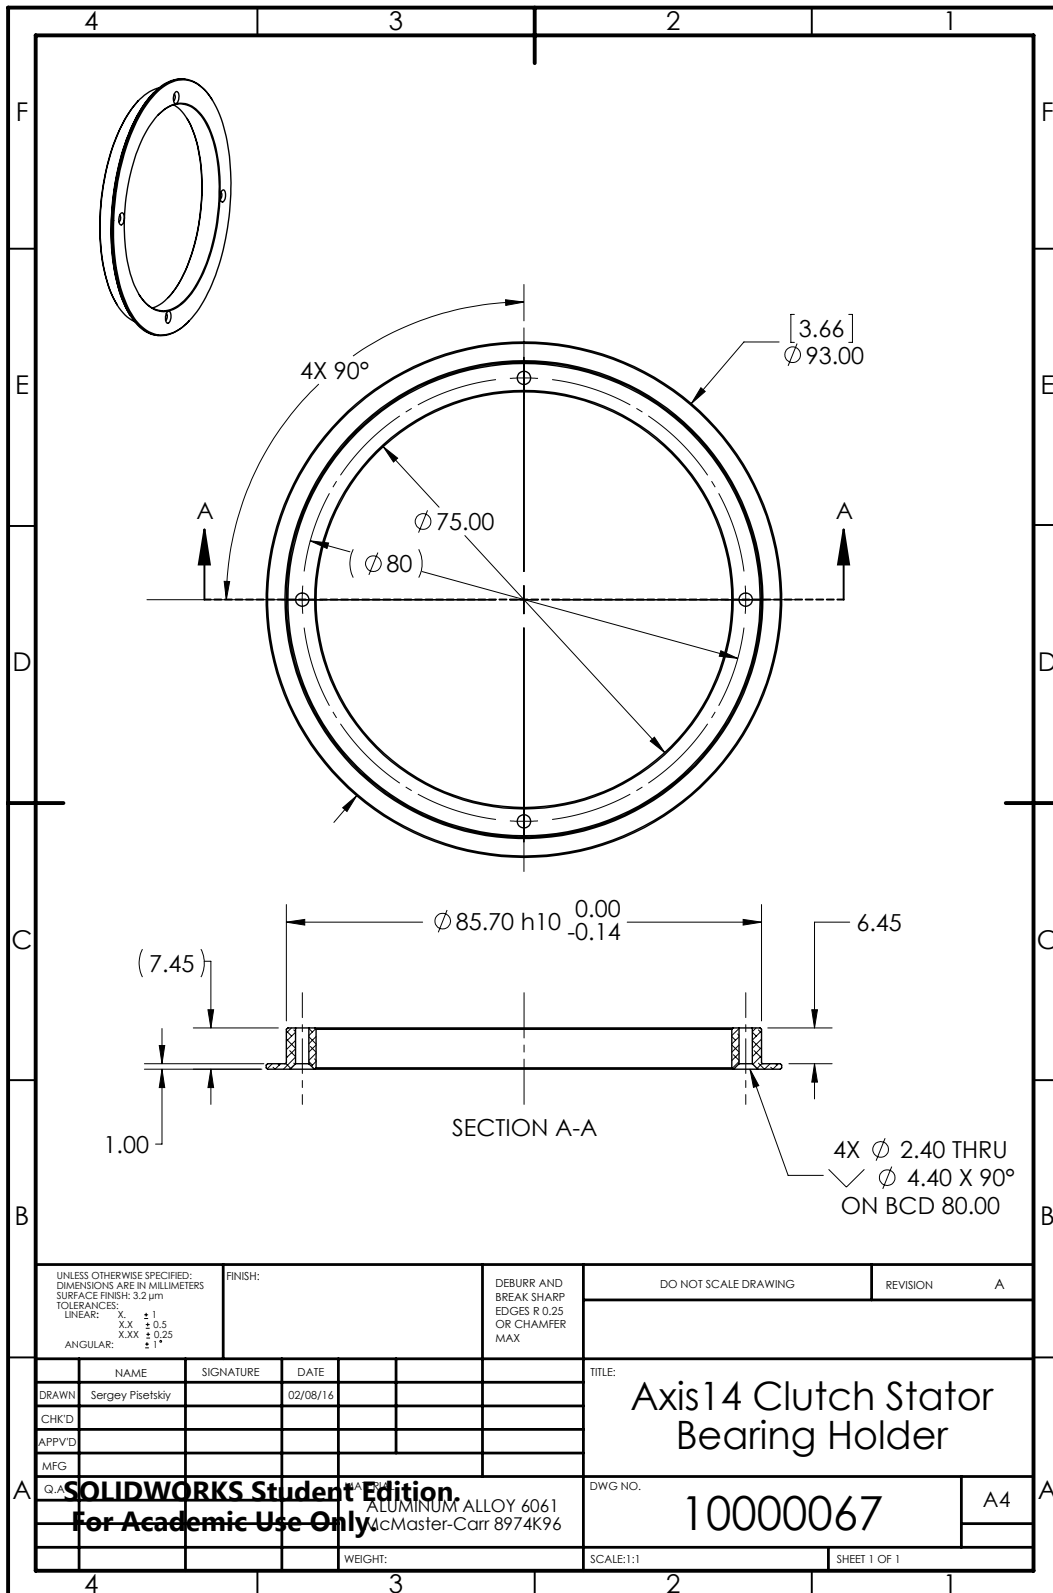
Drawing: Joint 1, 4 clutch stator bearing holder.
